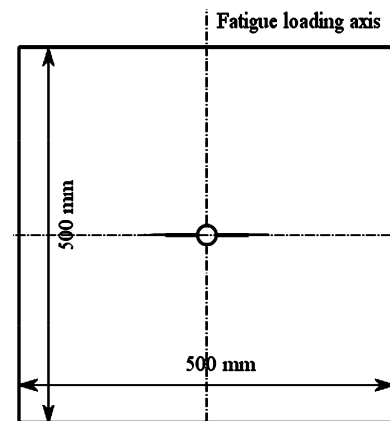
Initial plate with the hole, the notch and the fatigue crack.
